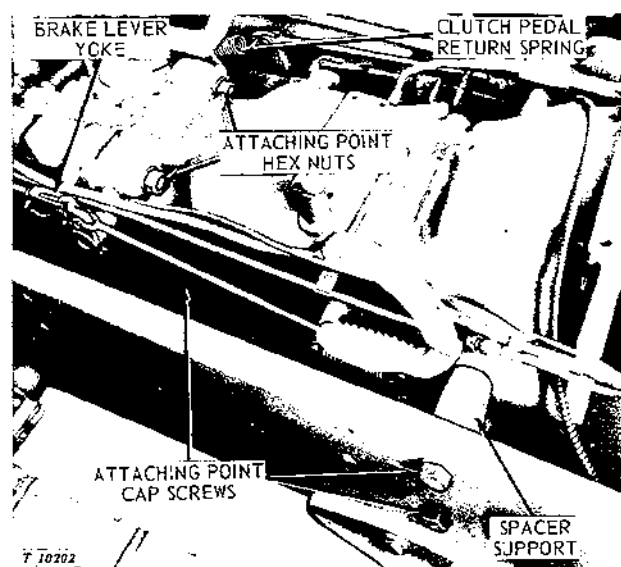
Reverser Case or Clutch Housing Attaching Points
